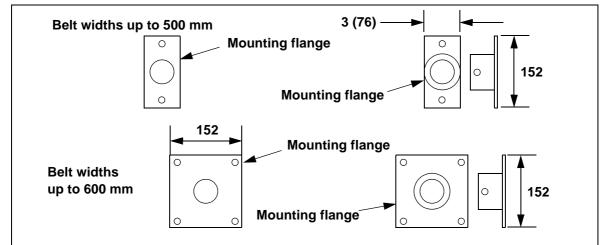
MARTIN[®] TORSION ARM[™] V-Plow mounting flange
